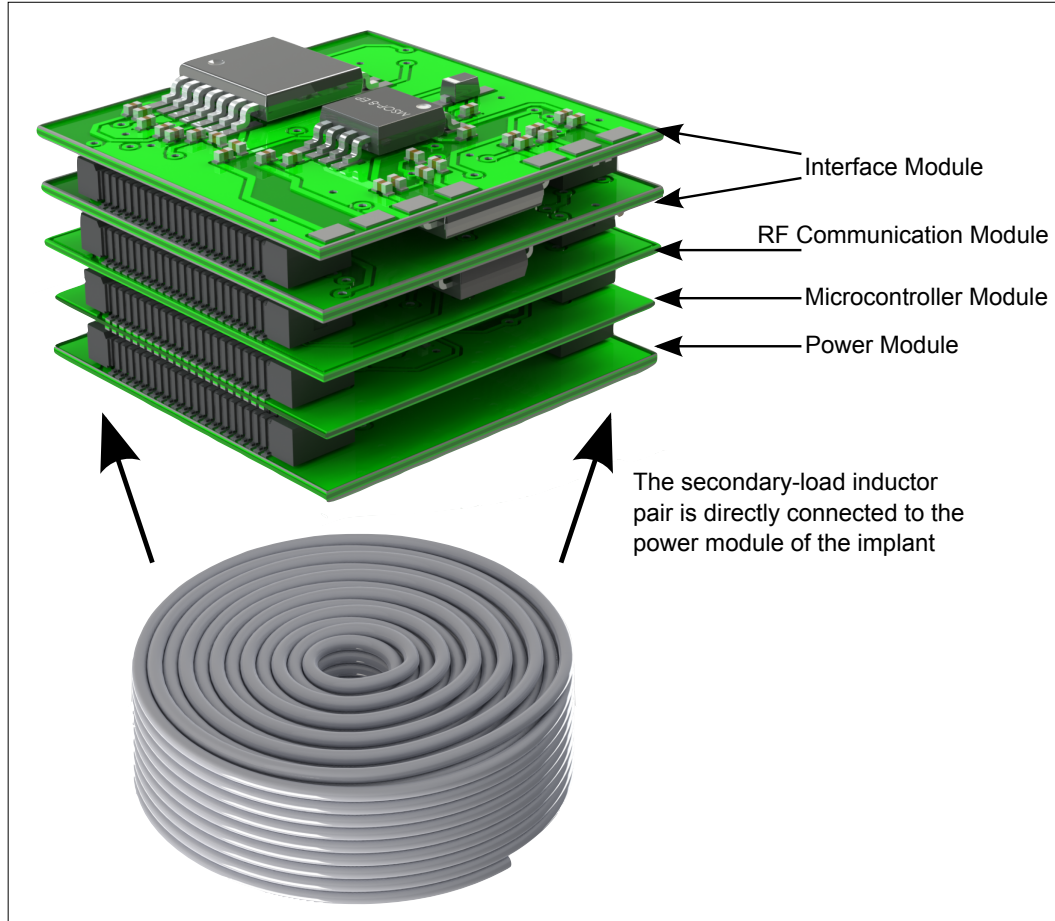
The implant PCB boards demonstrating where the inductor is connected.
